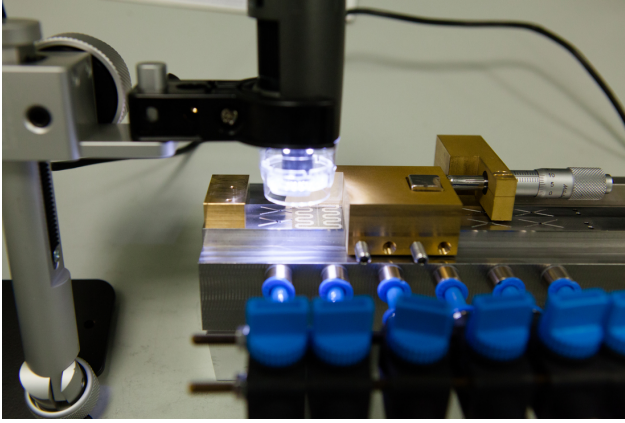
Assembly tool for the inner tracking ladders. Brass sliding block in the middle is guiding a prototype chip into position. Brass stop edge to the left. Micrometer screw to the right. Microscope to monitor position at the top.
